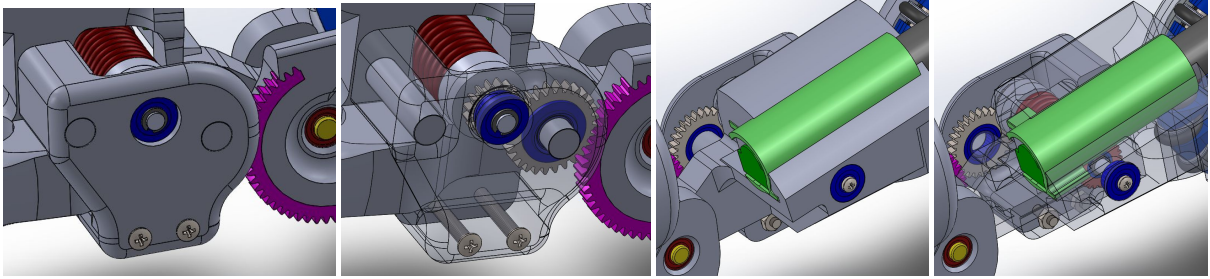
Design of the two arm parts together with the clamping mechanism.
